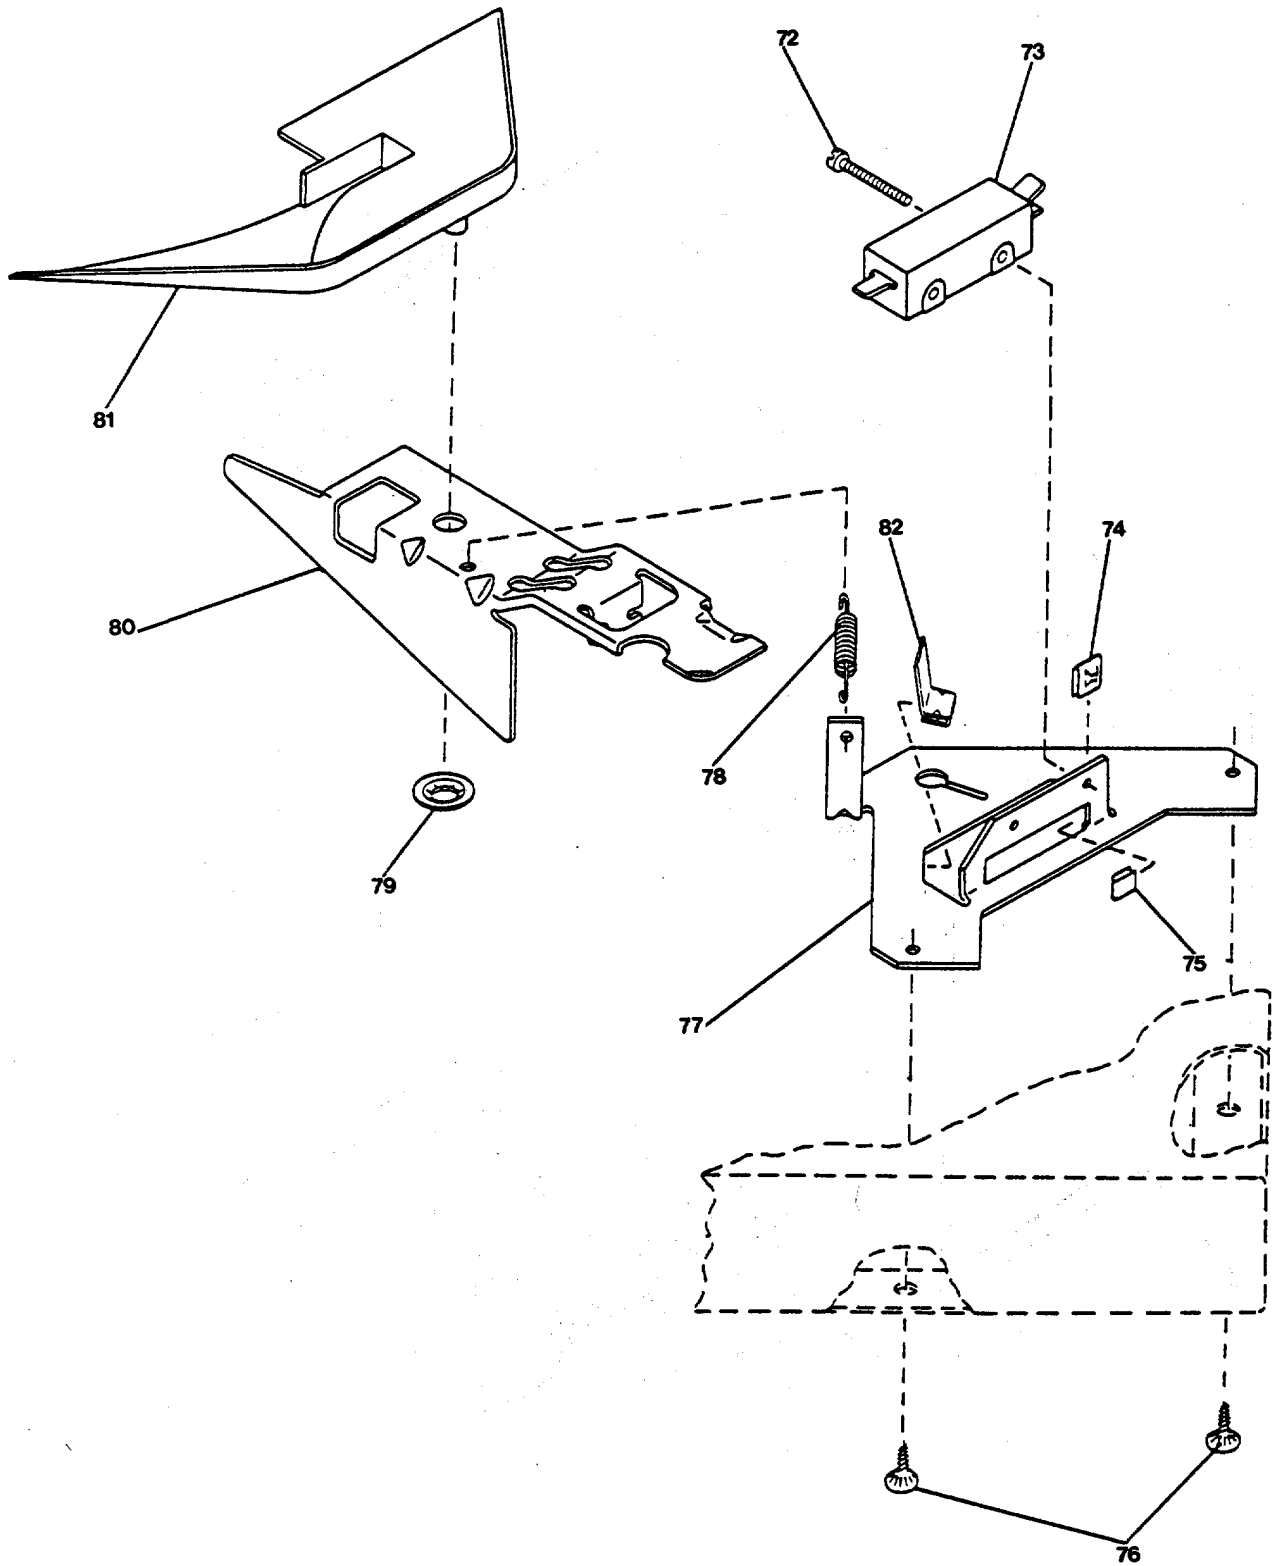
Washer Machine (Sheet 4 of 5).
